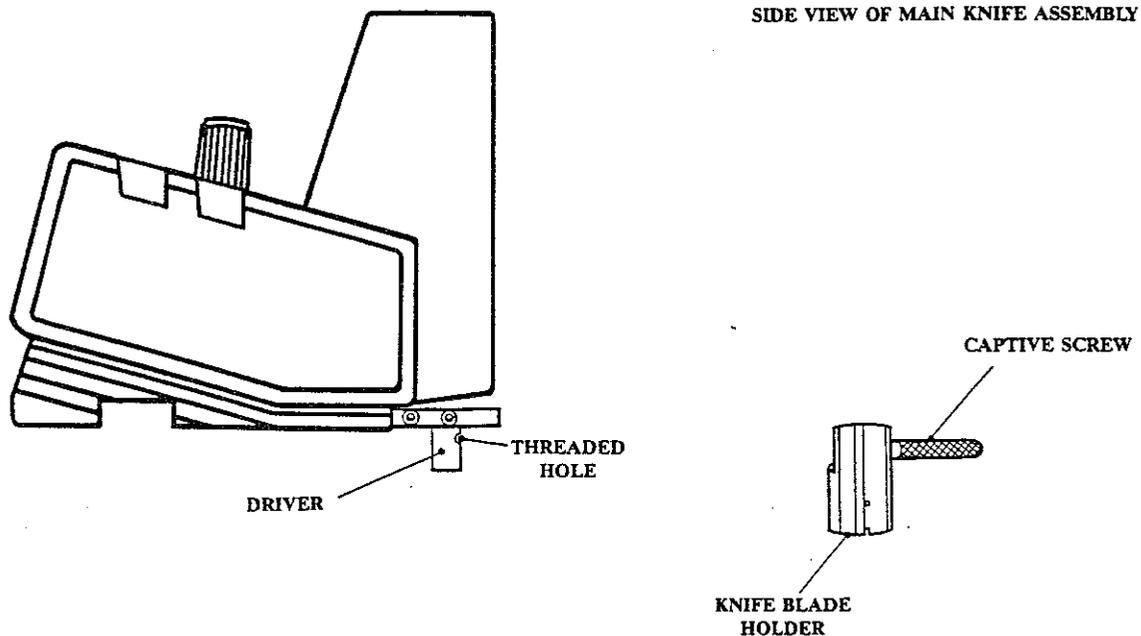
ATTACHING THE KNIFE HOLDER TO THE KNIFE ASSEMBLY
